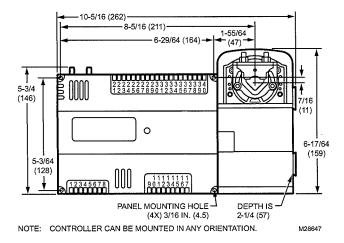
Panel mounting — controller and actuator dimensions in inches (mm) for model PVL6436AS only.
